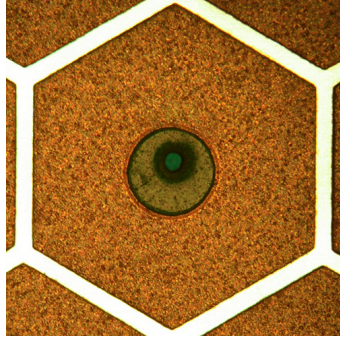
Photograph of a chip fabricated in PCB technology under combined front and back lighting
